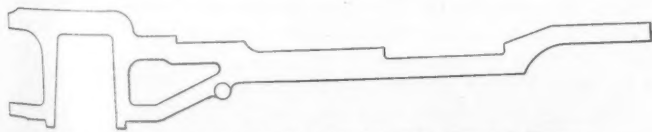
Cast Steel Section Welded to Forged Frame
